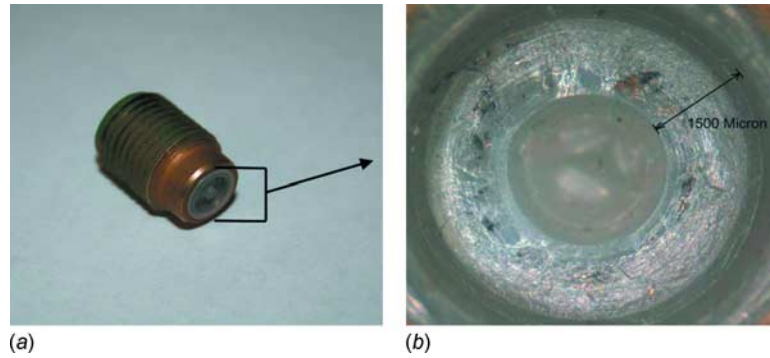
(a) Nylon seat removed from cylinder valve after the wear experiment; (b)  $15\times$  microscope enlarged view of the nylon sealing surface.
